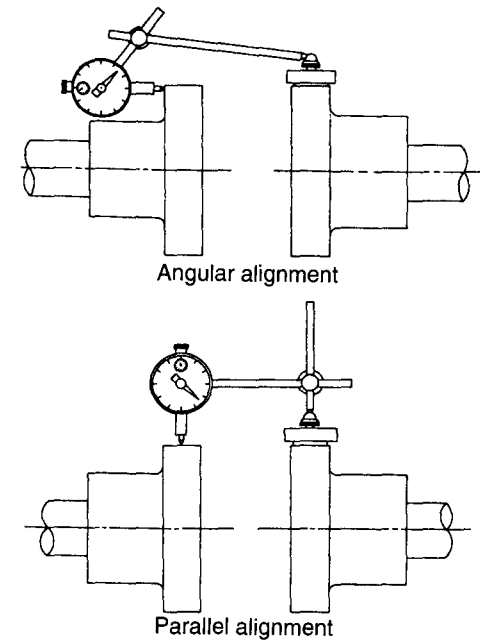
Coupling alignment, face-and-rim method with a dial indicator. Courtesy Ingersoll-Dresser Pump Company.
